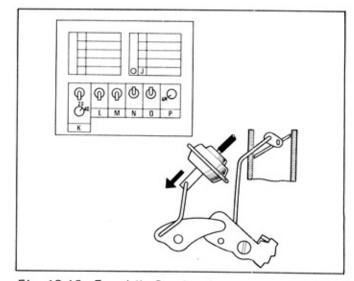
Fast Idle Breaker Inspection (4M)
